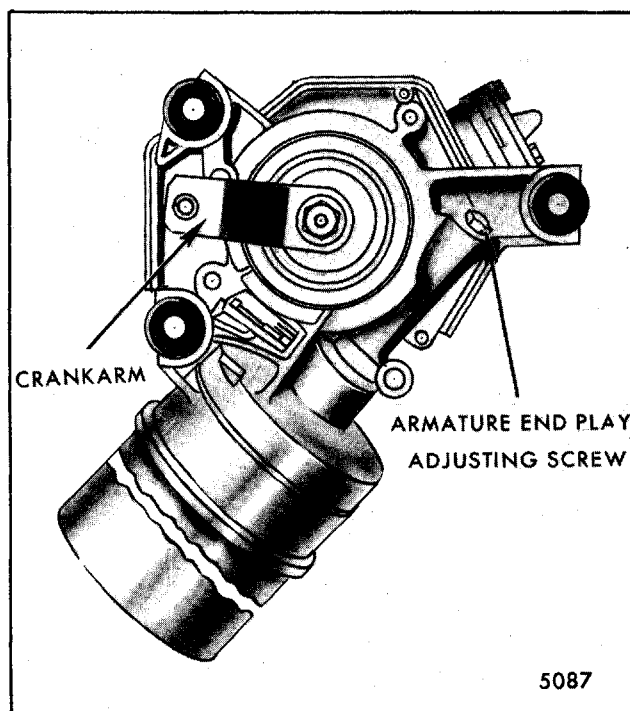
Wiper Motor and Crank Arm in Park Position
